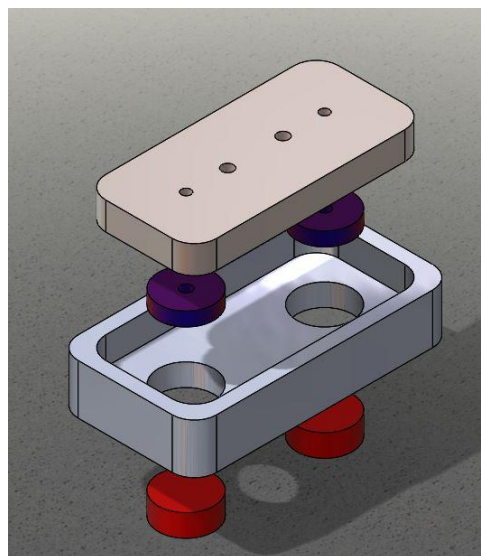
Specially designed zero-point mounting system of spatter analysis system for EOS M 290 machine.
